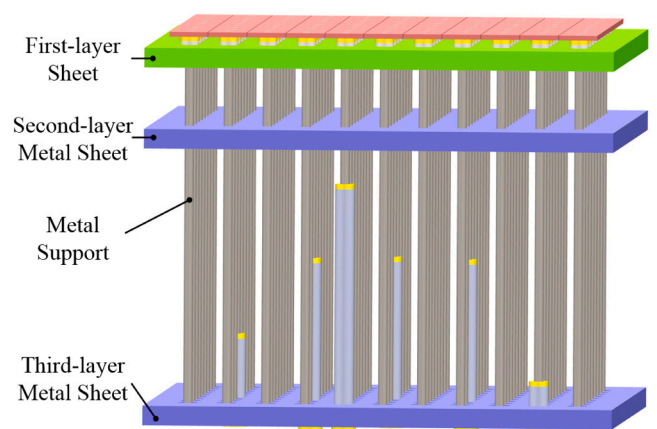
The schematic diagram of the reusable support apparatus with the 3-layer sheet structure design.
